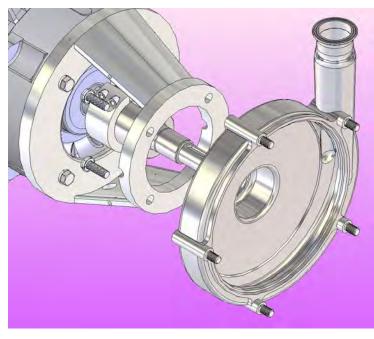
(models 3450, 3550, 1051, 1161, & 4001 only)
